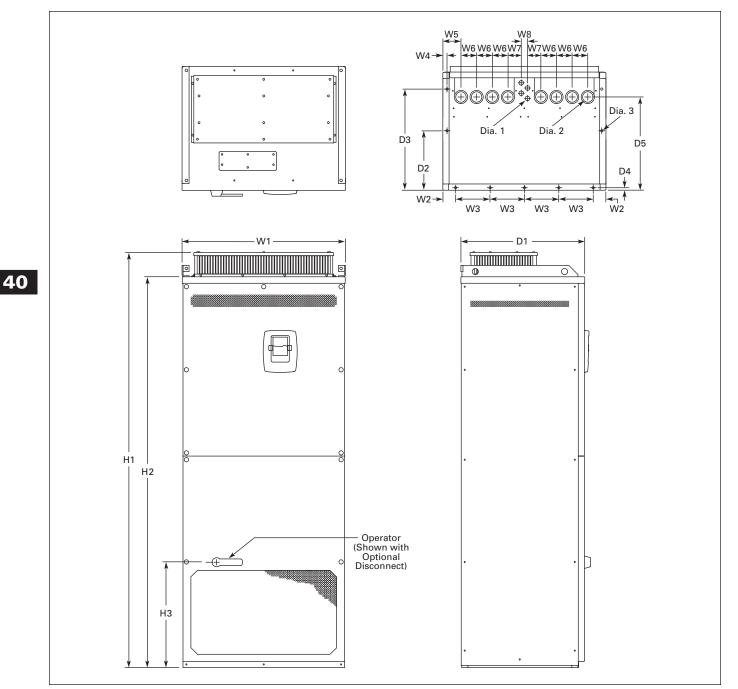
9000X Dimensions, NEMA Type 1 FR11 Freestanding Drive
